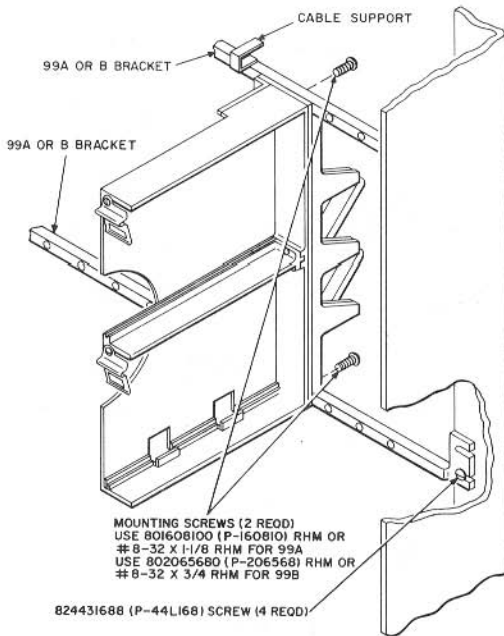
69-Type Apparatus Mounting on a 99-Type Bracket
